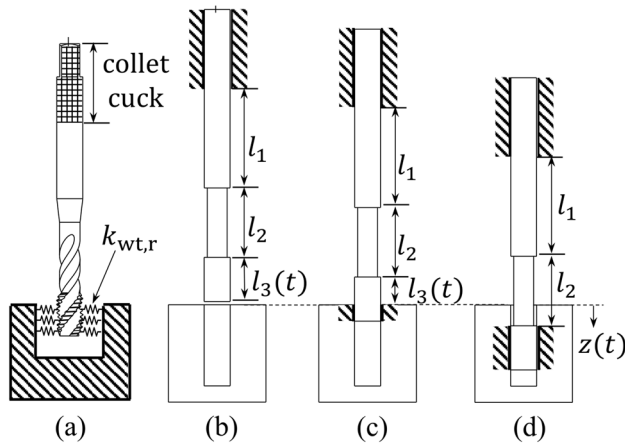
a Workpiece-Tool contact considering radial stiffness only, b–d Temporal length of the tapping tool considering clamped boundary condition for workpiece-tool contact
